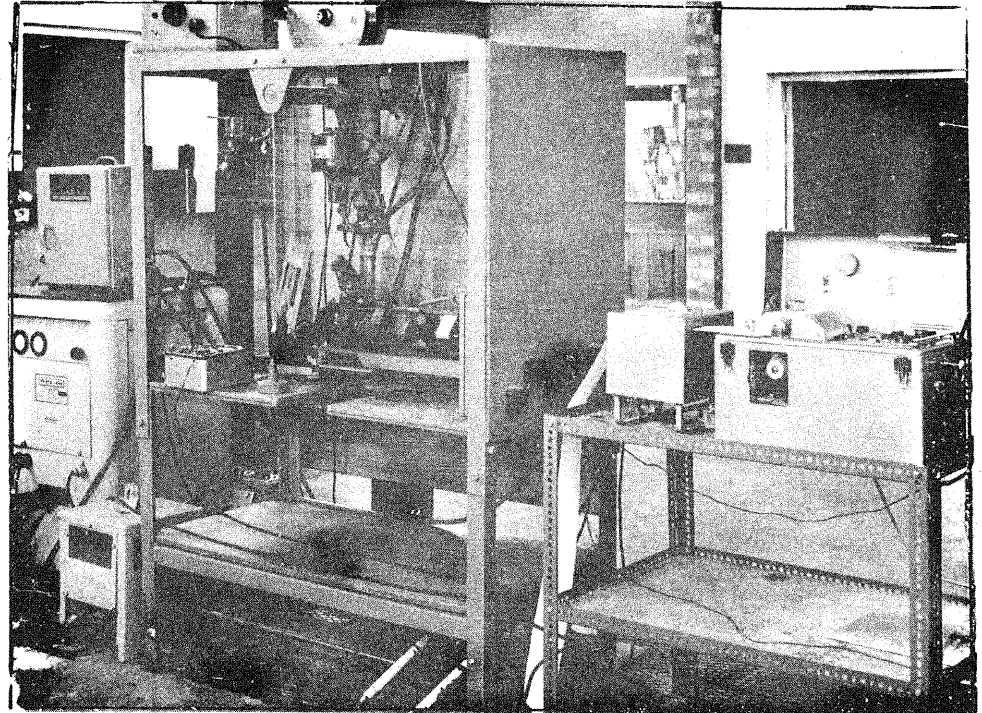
TEST APPARATUS SHOWING POWER SOURCE "A", WELDING HEAD AND OSCILLOGRAPHIC RECORDER.
